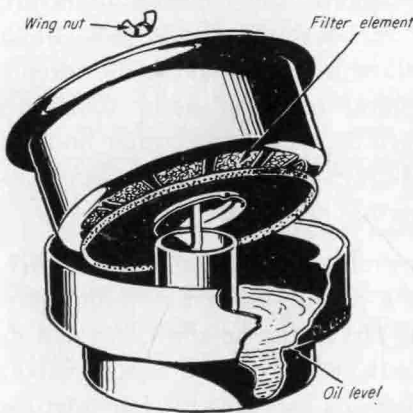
Air cleaner with wing nut and filter element removed and the side partly cut away to show oil level.
